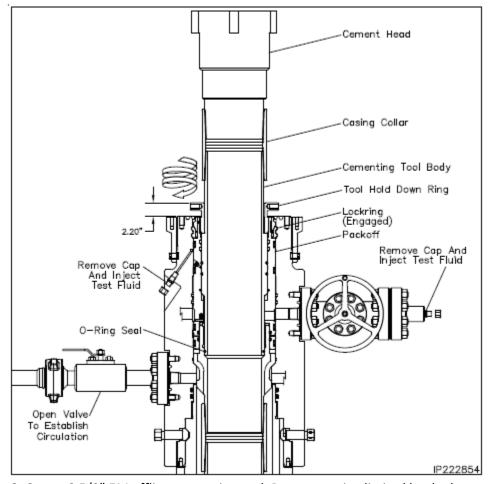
Cactus 9 5/8" 5M offline cementing tool. Pressure rating limited by the lesser of 5M tool rating or the 9 5/8" pup joint and casing.
